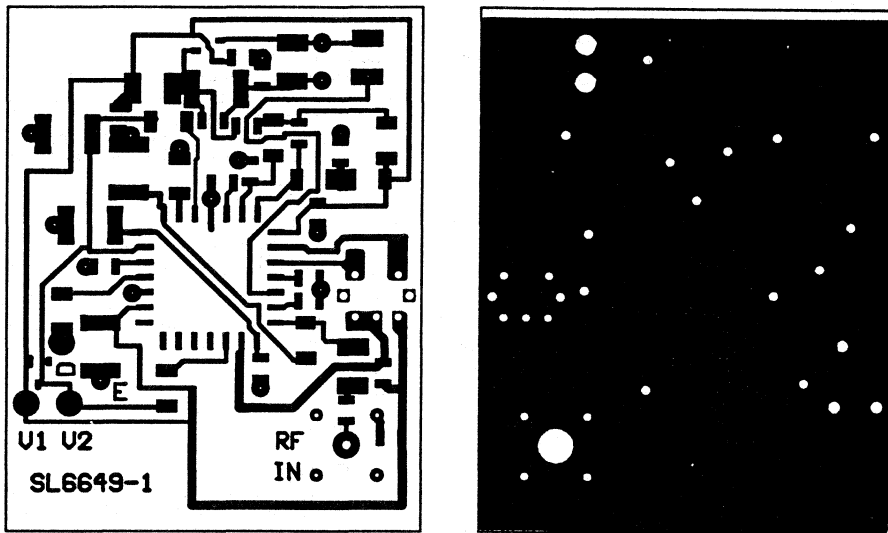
Example demo board layout (transformer version at 153MHz LCC package)
